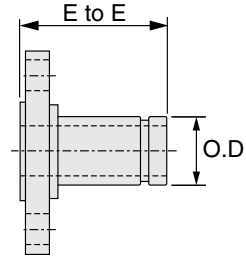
SS STAINLESS STEEL FLANGE ADAPTER
